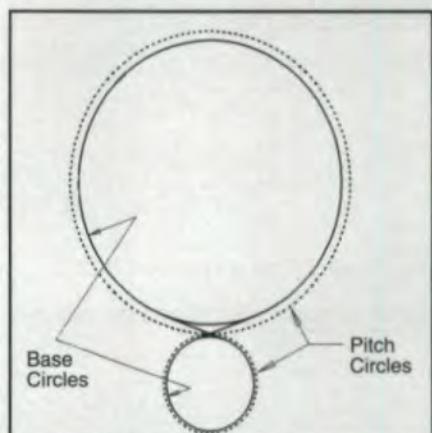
Involute geared transmissions are ideally equivalent to crossed-axis belt drives.
